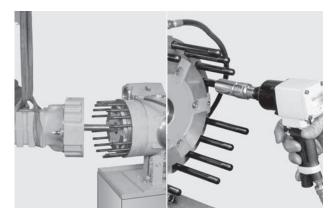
Remove arm together with brakes and axle shafts; lay down the arm vertically.
